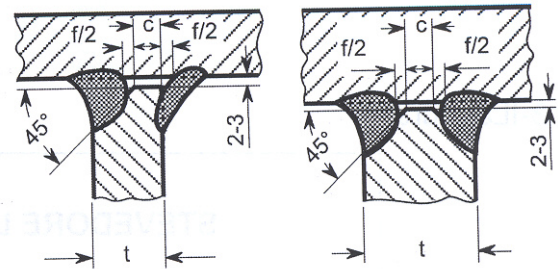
Single and double-bevel welds with unwelded root face and defined incomplete root penetration
